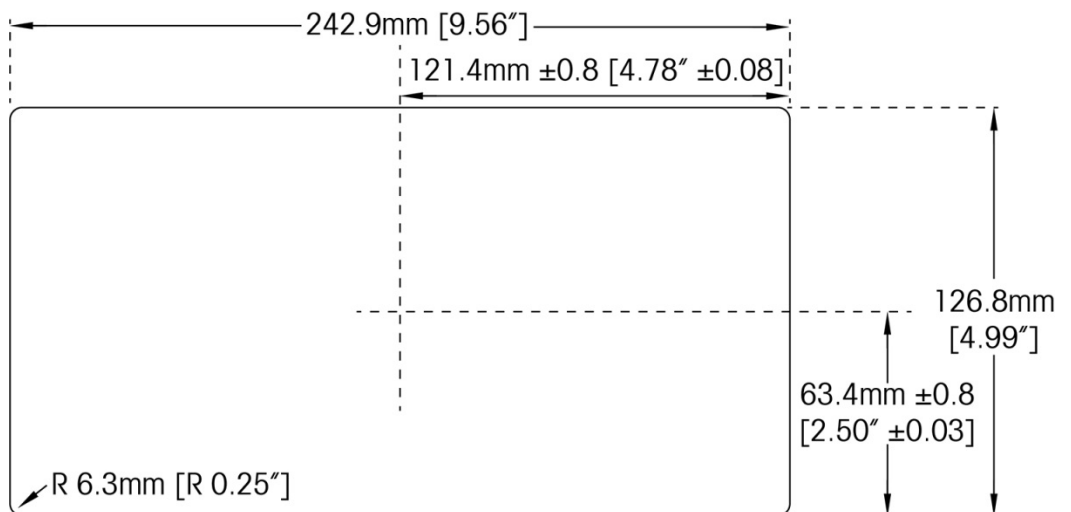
IND570 Panel Mount Cutout Dimensions
